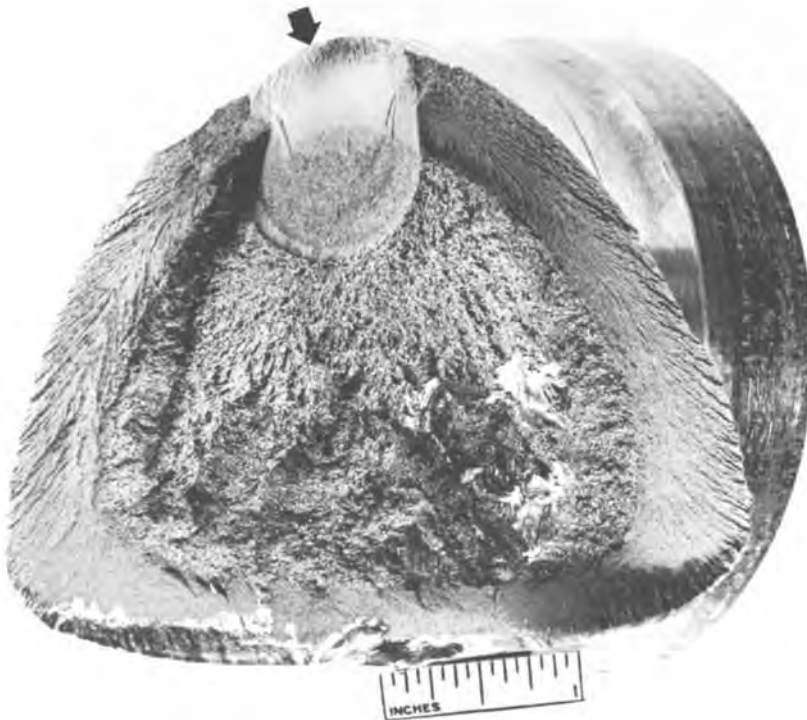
Surface of a torsional fatigue fracture that caused brittle fracture of the case of an induction-hardened axle of 1541 steel. The fatigue crack originated (arrow) at a fillet (with a radius smaller than specified) at a change in shaft diameter near a keyway runout. Case hardness was about 46 HRC at the surface. Note the well defined chevron marks in the two brittle fractures pointing toward the roughly circular fatigue portion of the fracture. Note also that this fracture is at a 45° angle to the shaft axis, as is typical of fatigue and brittle fracture of shafts in torsion.
